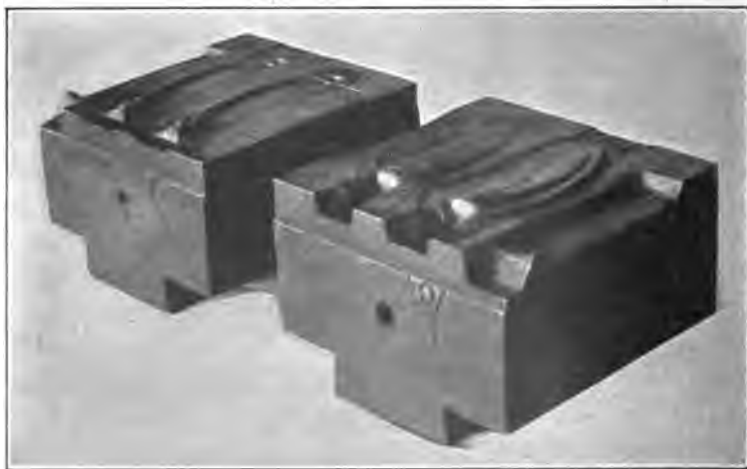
DIE BLOCKS FOR THE BUTT PLATES OF A RIFLE SHOWING INTERLOCKED DIE'
